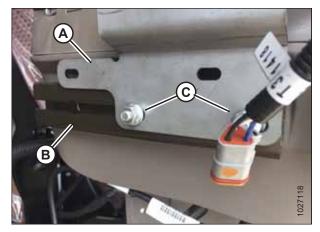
Side View of Seat with Supports Installed in Alternative Location
